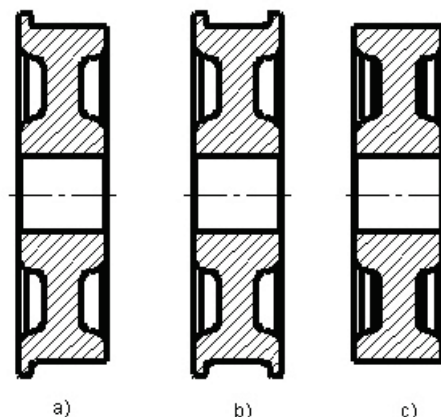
Left: Wheel with a single rim; Center: Wheel with two rims; Right: Wheel without a rims
